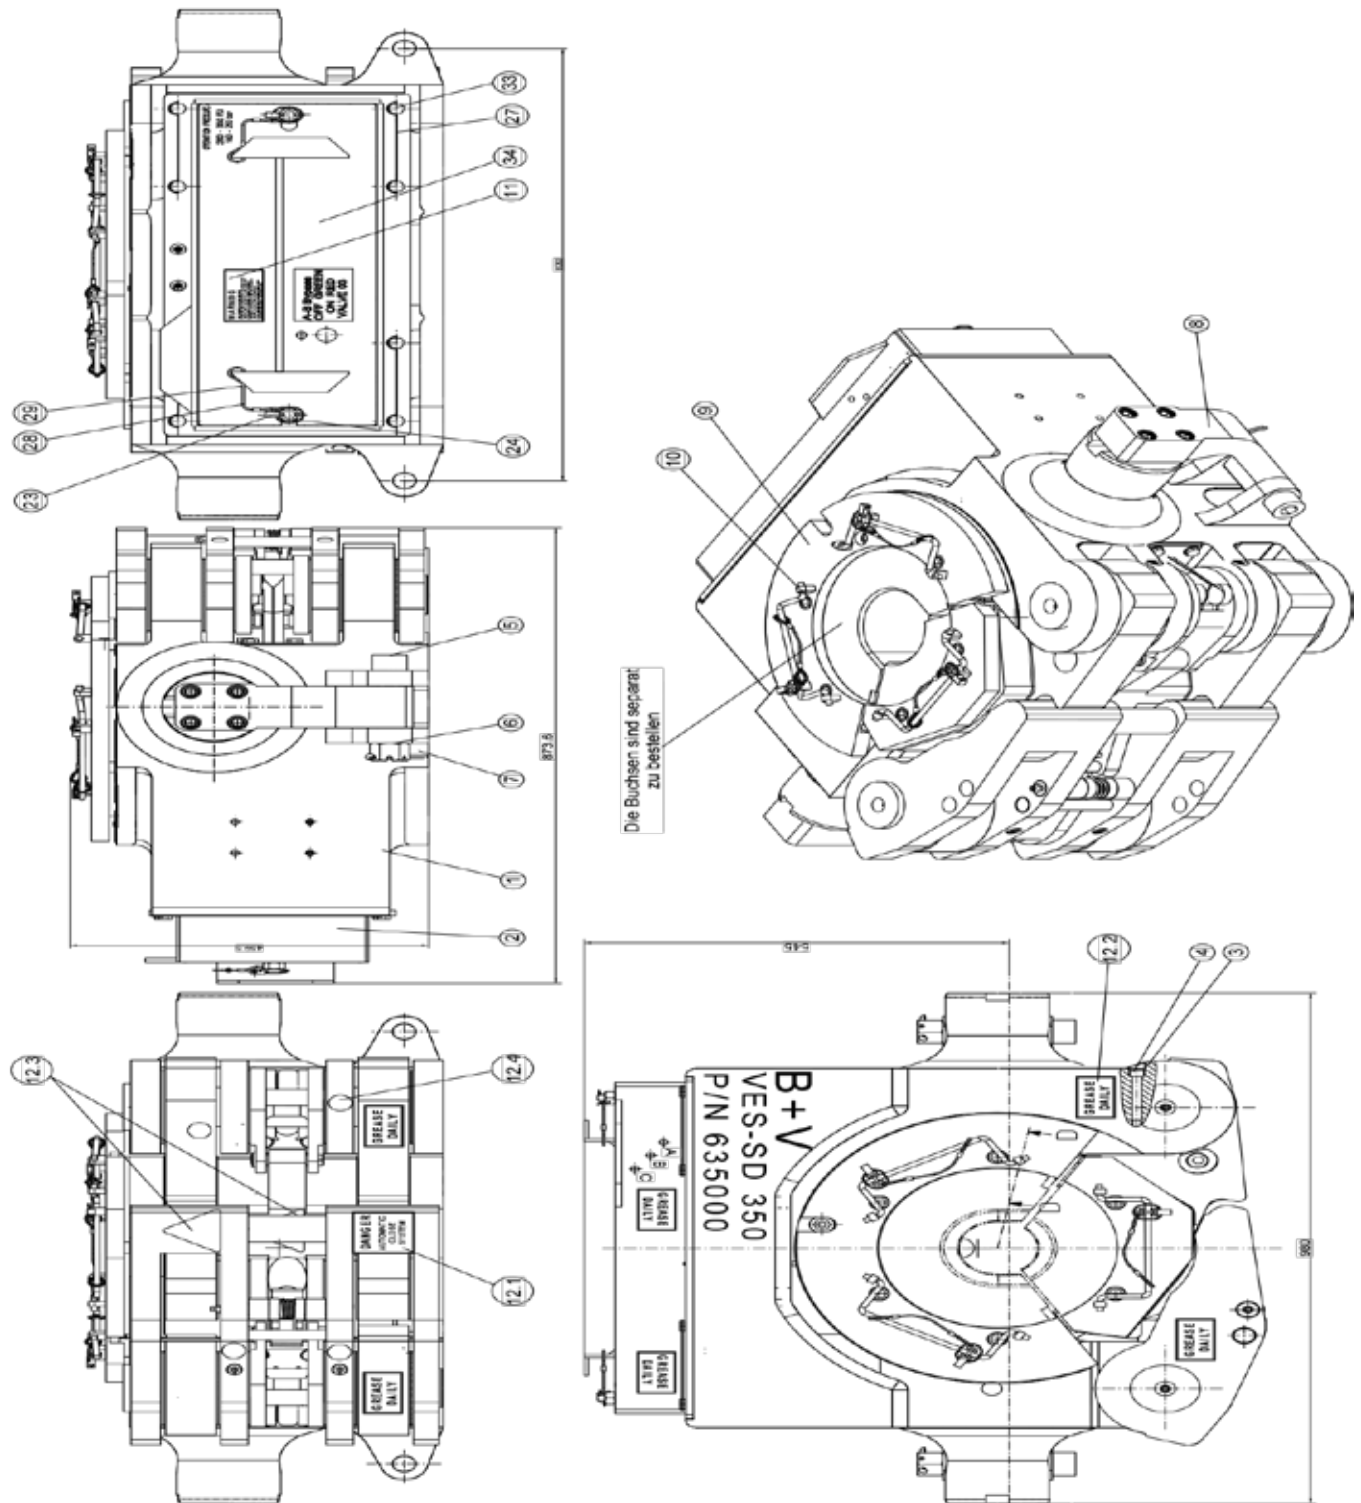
Drawing 635000-Y VES-SD 350 Page 1
